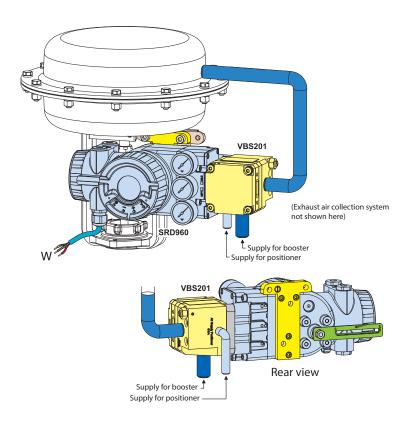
EXAMPLE FOR MOUNTING VBS201 at SRD991 / SRI990, directly side mounted
